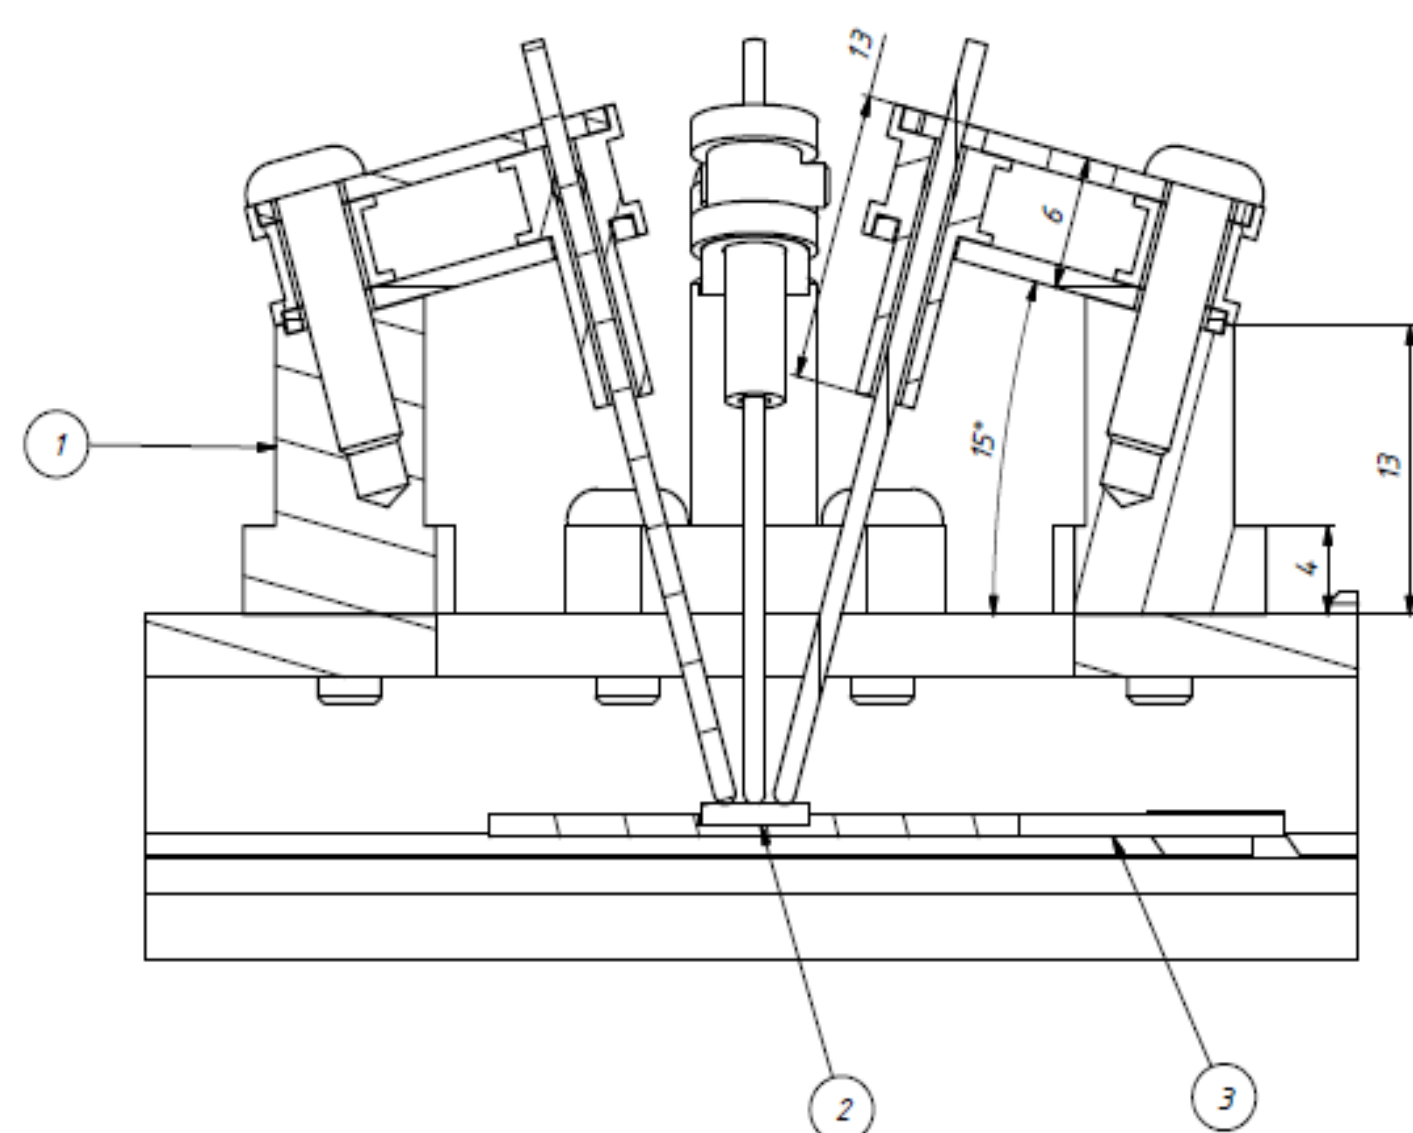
A section of the heating plate with a measurement probe holder for 5 mm SiC discs
